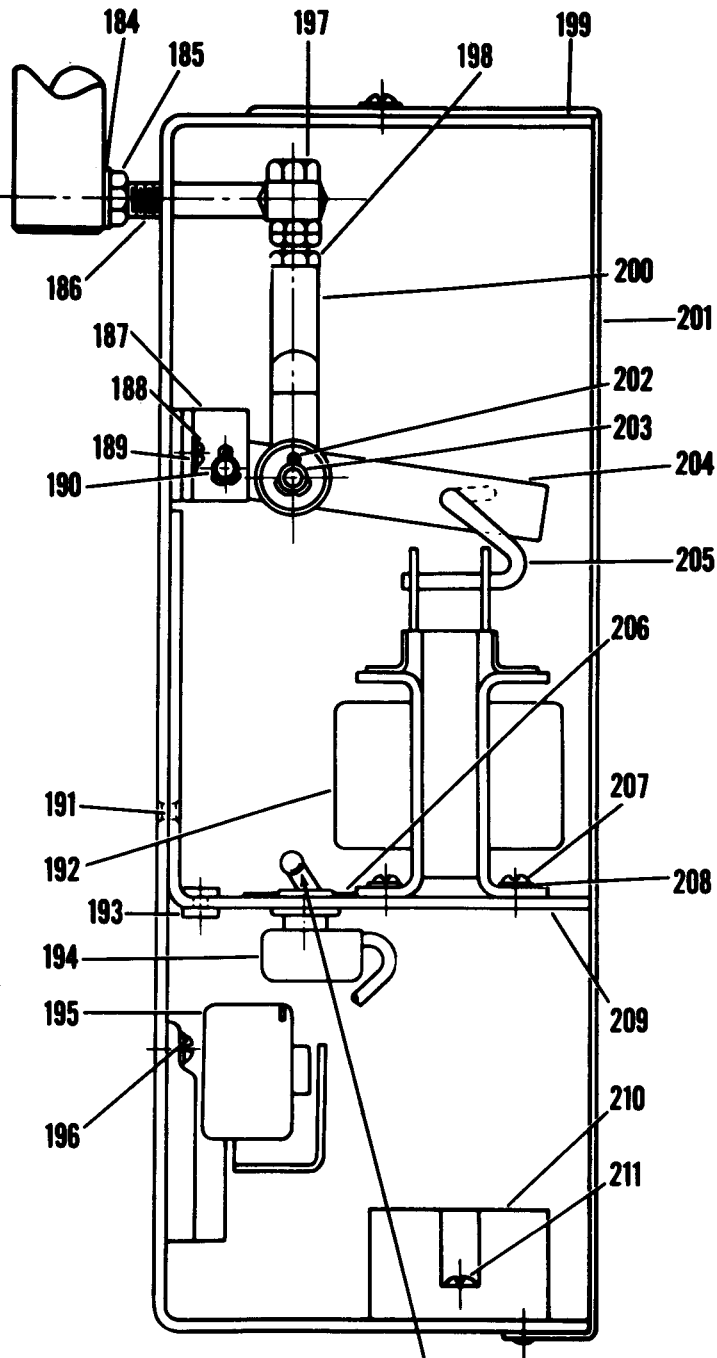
WIRE GUIDE & OILER ASSEMBLY FOR MODEL N3D
